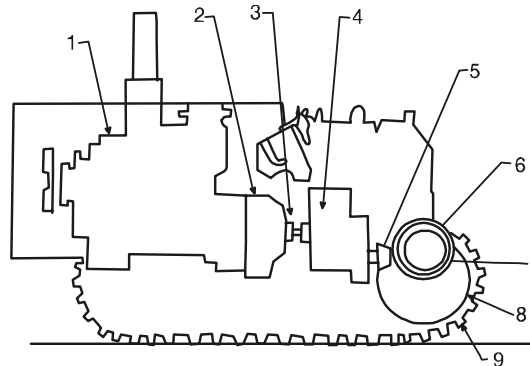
Power-train of a tractor dozer. (1-Engine, 2-Main Clutch, 3-Universal Joint, 4-Transmission, 5-Bevel Pinion, 6-Steering clutch, 7-Steering brake, 8-Sprocket, 9-Track).
